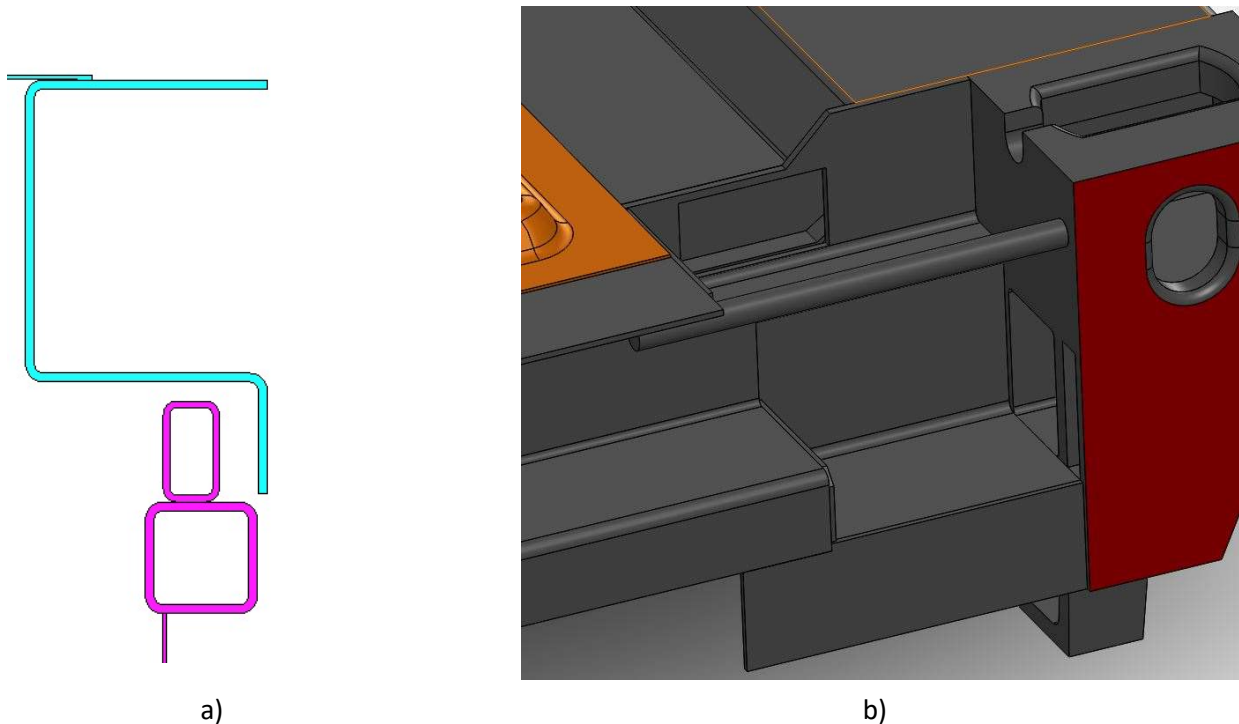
a) Top side rail open section cross-section; b) Detail of the connection between the top side rail and the corner
